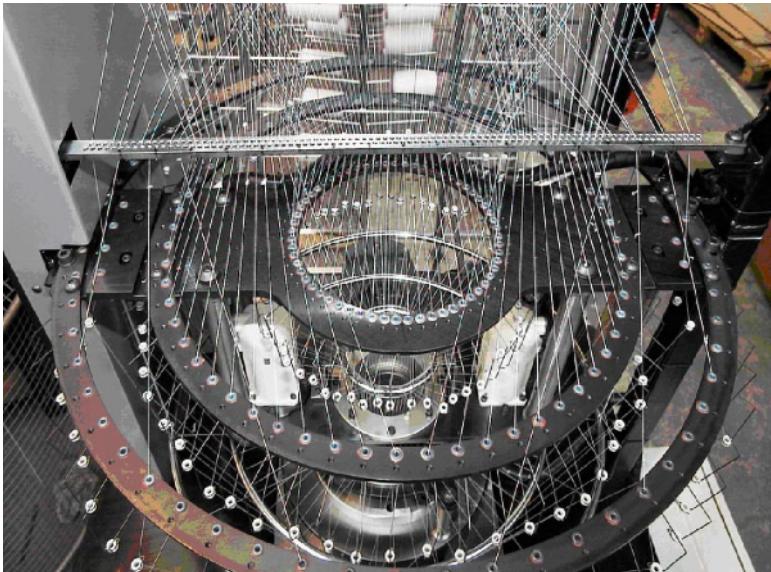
The servo motor driven patterning rings on the prototype machine
